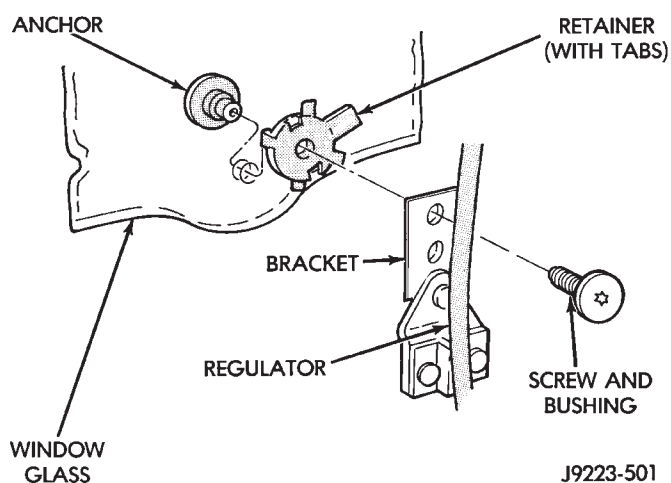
Regulator-To-Glass Screw Removal/Installation
